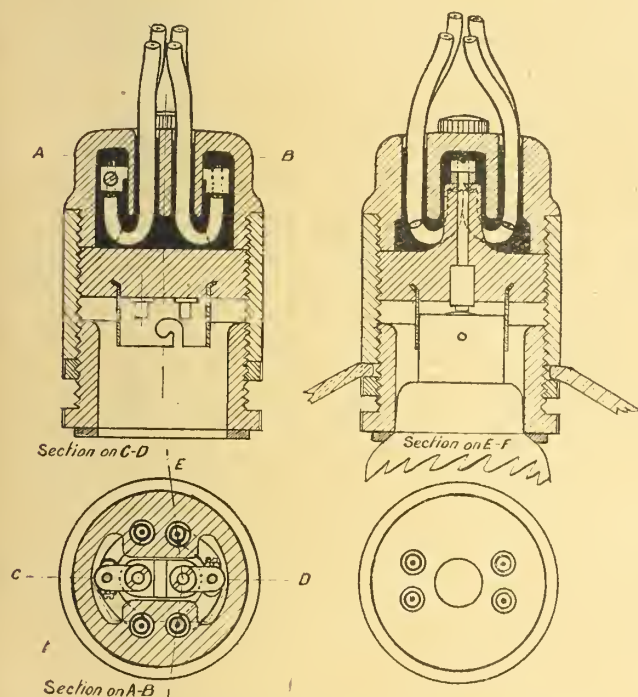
SECTIONS OF WHITE'S CORROSION-PROOF LAMP-HOLDER, "LOOP-IN" TYPE.
